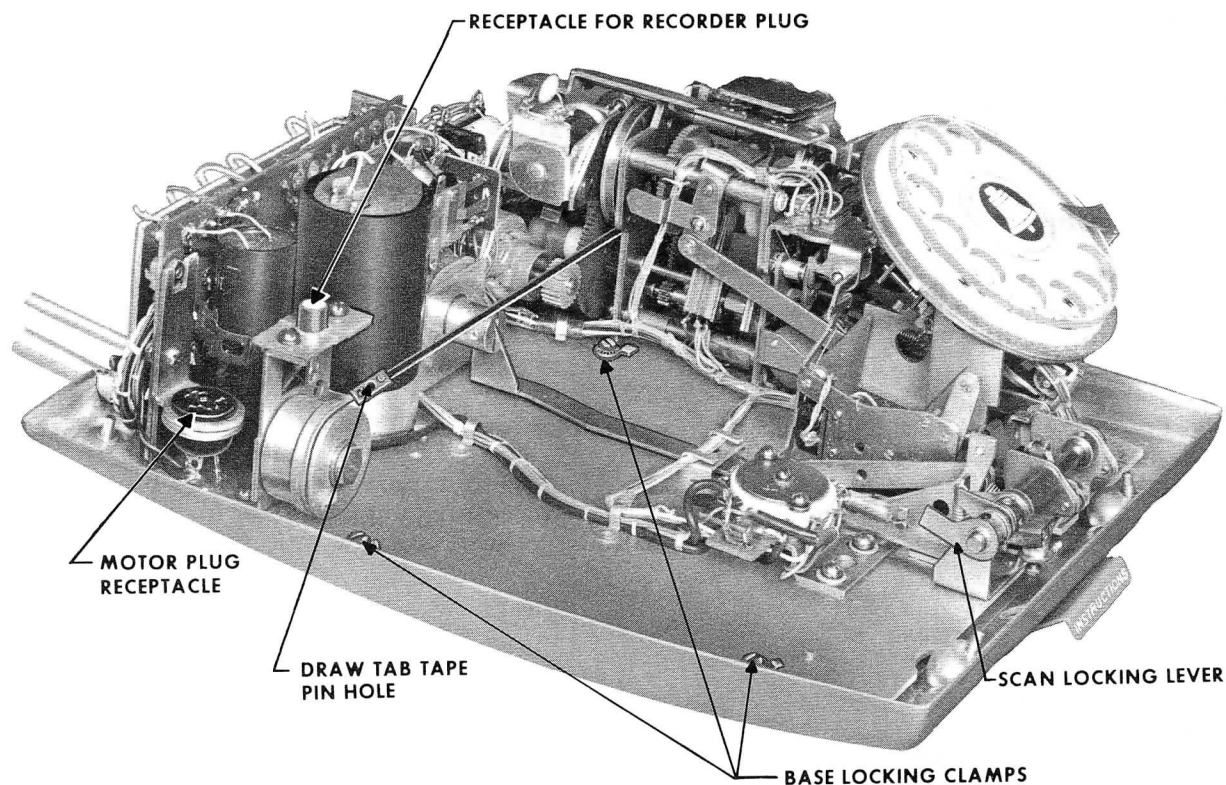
KS-16844 List 2 with List 12 Tape Assembly Removed
